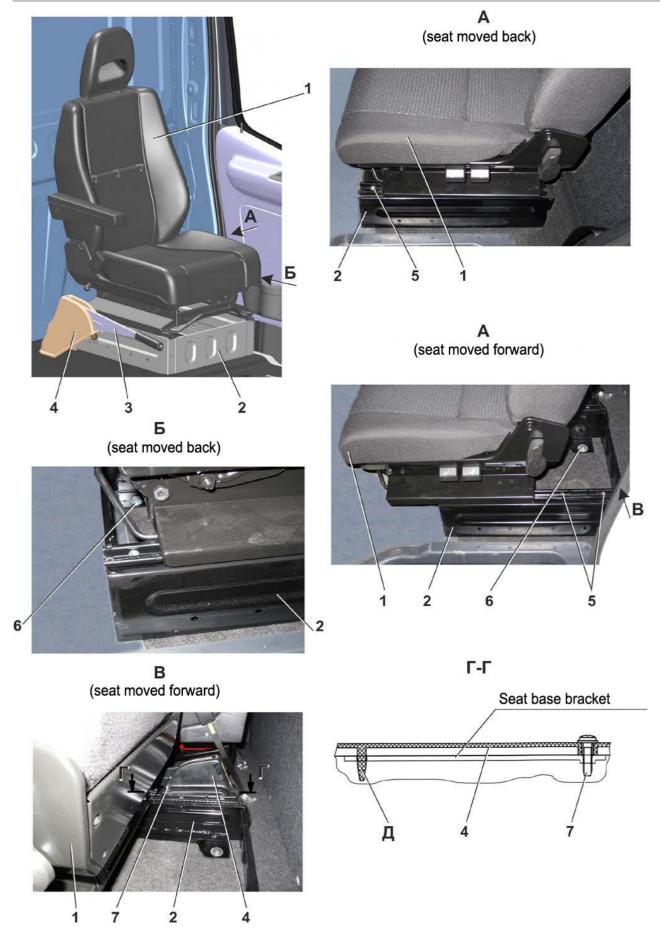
Driver's seat installation: 1 – seat; 2 – seat base; 3 – parking brake lever; 4 – lever casing; 5, 7 – screws; 6 – bolts
